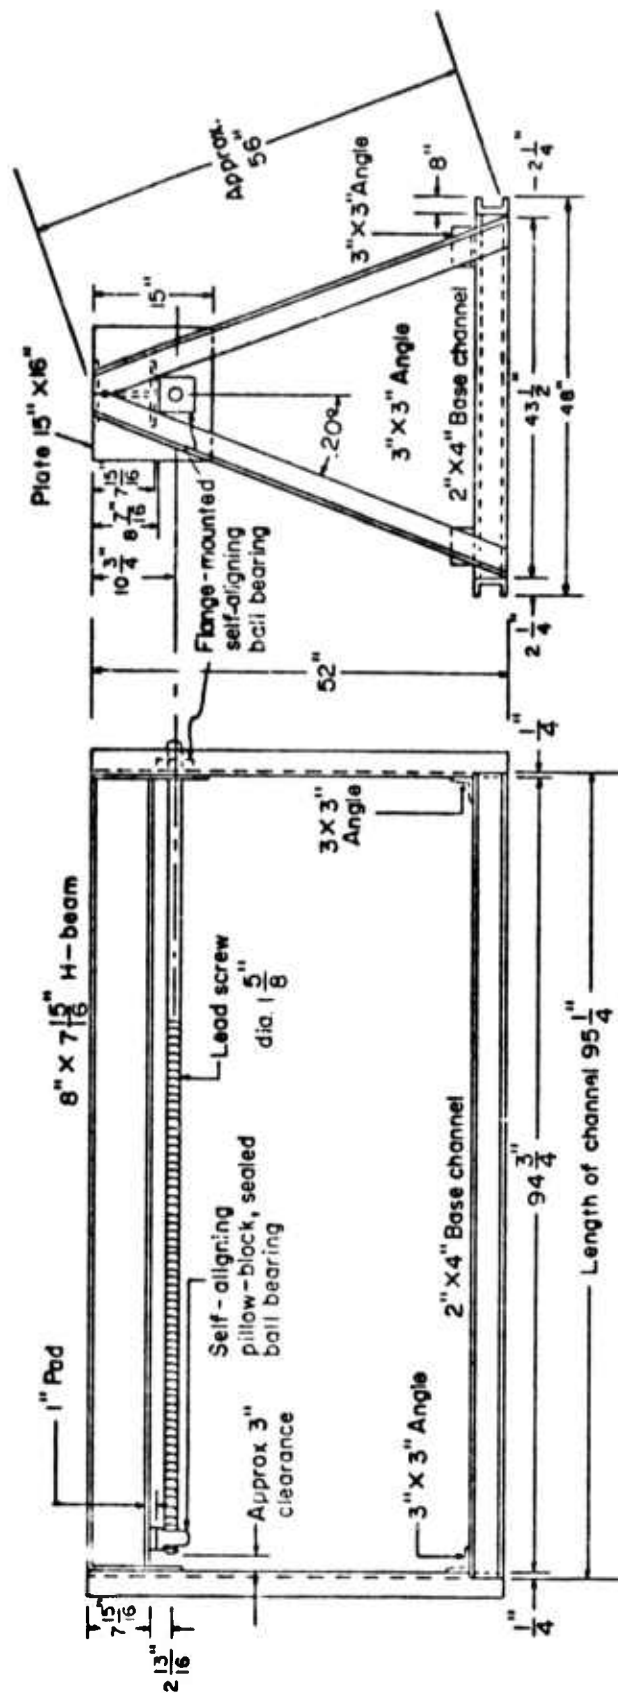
Welded steel frame and drive screw for large cutting apparatus
